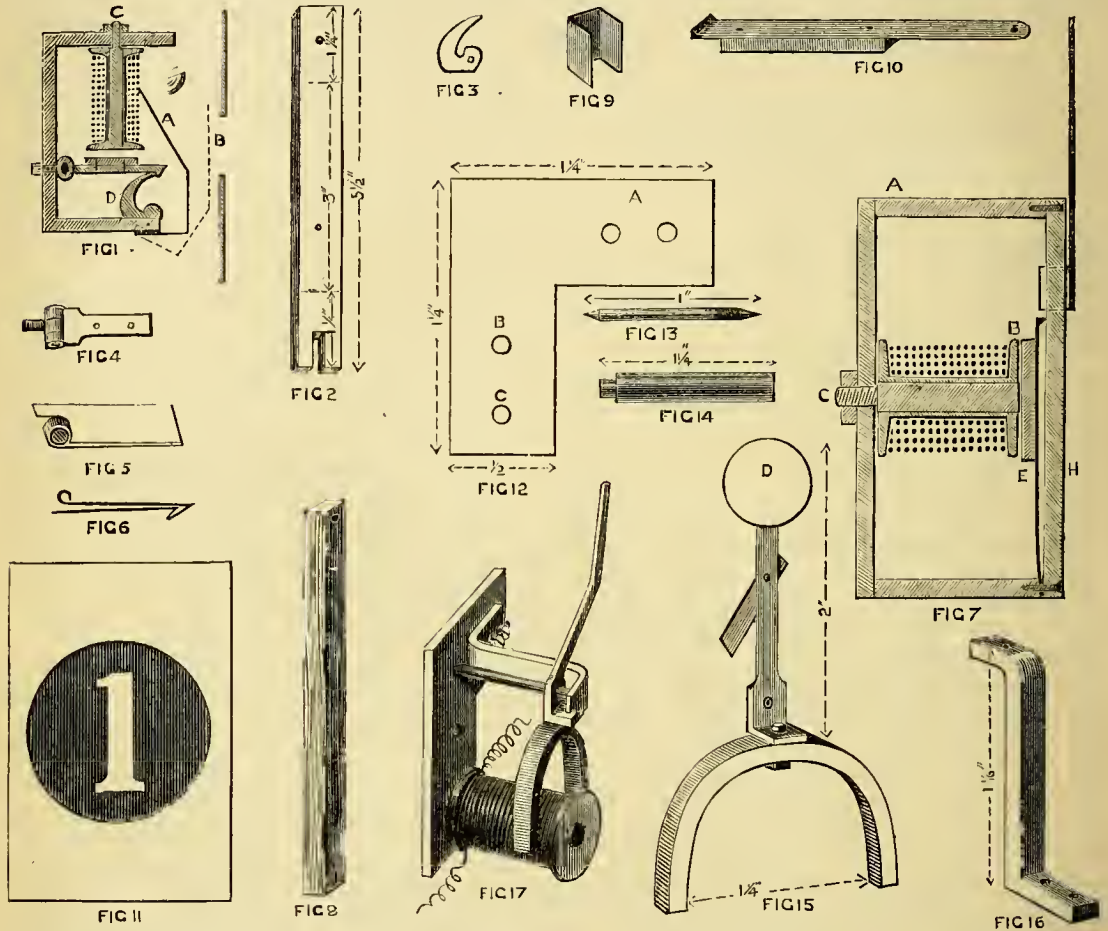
SECTION OF MECHANICAL REPLACEMENT INDICATOR. FIG. 2.—BASE OF INDICATOR. FIG. 3.—BRASS CAM. FIGS. 4, 5, 6.—SUGGESTIVE LEVERS. FIG. 7.—SECTION OF NEWMAN'S INDICATOR. FIGS. 8—11.—PARTS OF NEWMAN'S INDICATOR. FIGS. 12—17.—PARTS OF ELECTRICAL REPLACEMENT INDICATOR.
